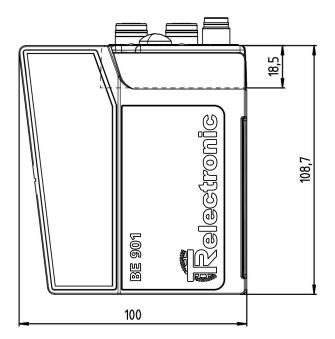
Dimension drawing BE 901 SSI with BE 901 MS SSI connection hood (all dimensions in mm)
